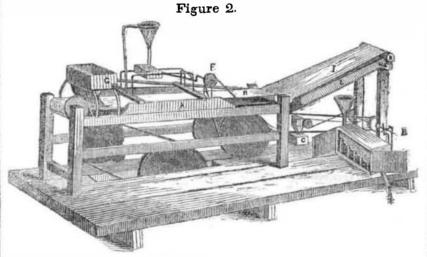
As the same letters represent like parts described in Fig. 1, we only refer to D, the screen or bolter, which sifts the sand by a rotary motion. The sand is put into the tunnel and is bolted through the wire gauze which is placed on a shaft on an incline. K, exhibits where the steam enters into the drver, which is a flat copper cylinder. The paper is placed upon the canvas or web near to G, and it is carried on the web forward and covered with glue by a brush as broad as the web, which is connected to the size box G, and kept wet with the glue. Passing forward from the brush vnder E, the paper is sprinkled with sand by
